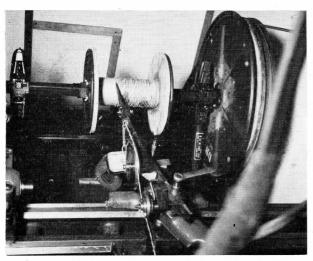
COIL WINDING FORM INSTALLED IN MACHINE.
